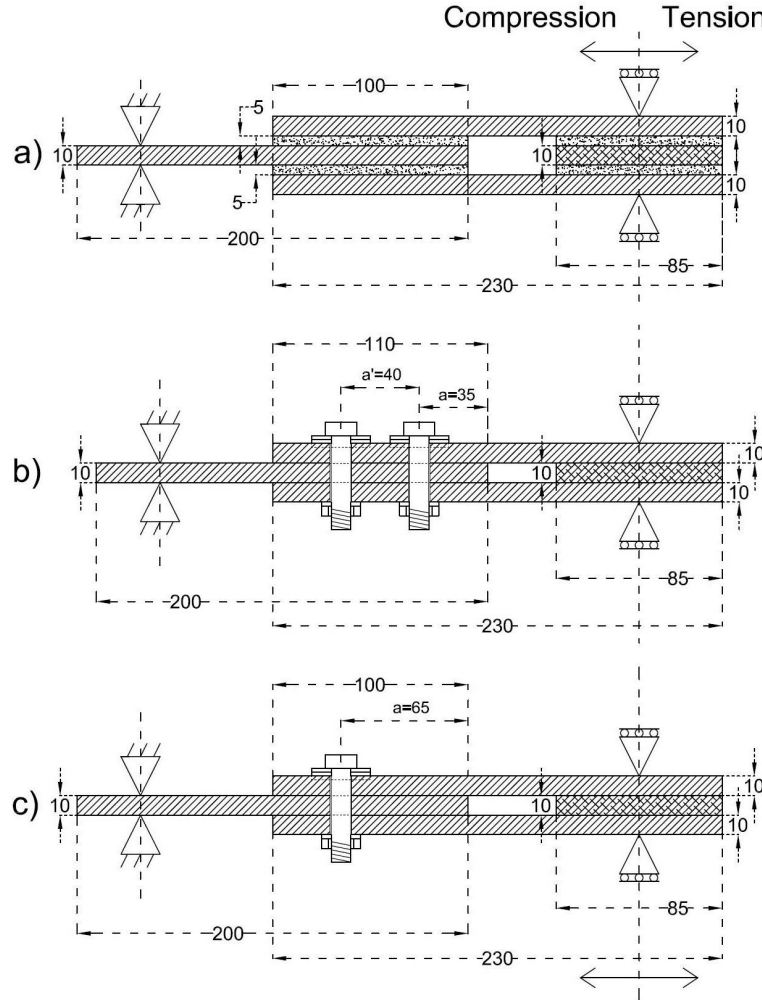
Specimen dimensions (mm) in longitudinal section of a) adhesive, b) four-bolt, c) two-bolt joint (two bolts across the width in each case).
